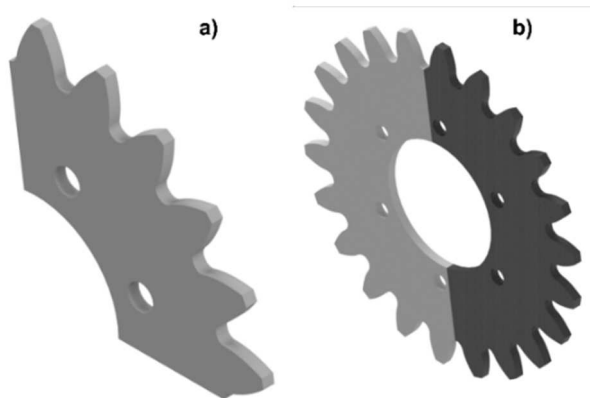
The geometry of used gearing samples, a) input gear segment (pinion), b) output combined gear
